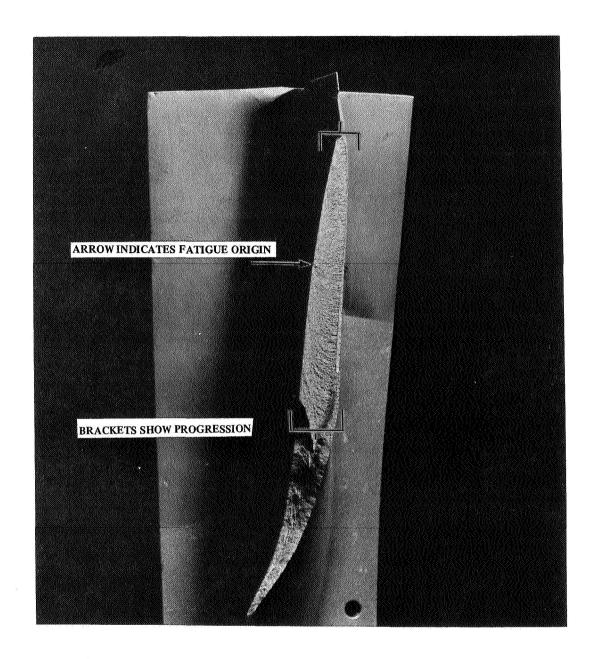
Fatigue Progression on Failed Rotor Blade No. 2
